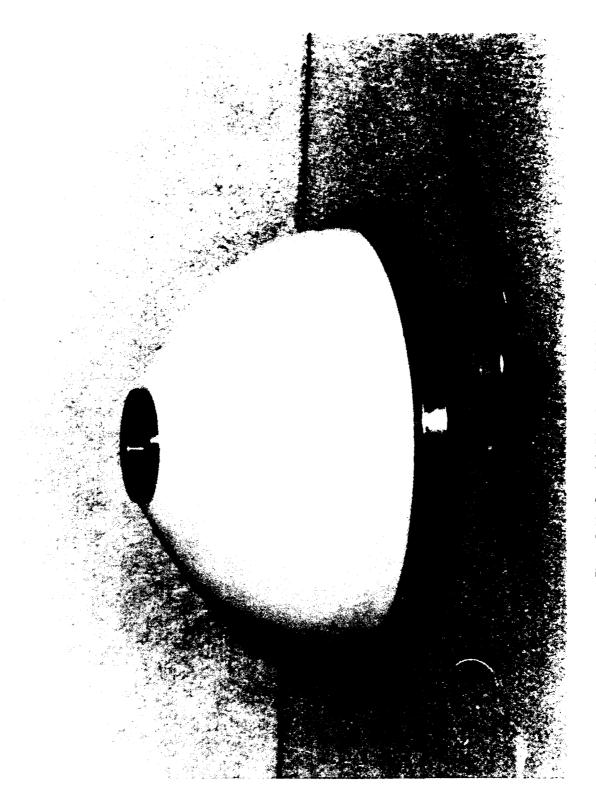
Ceramic bulkhead assembly Mod 1; exterior view.
